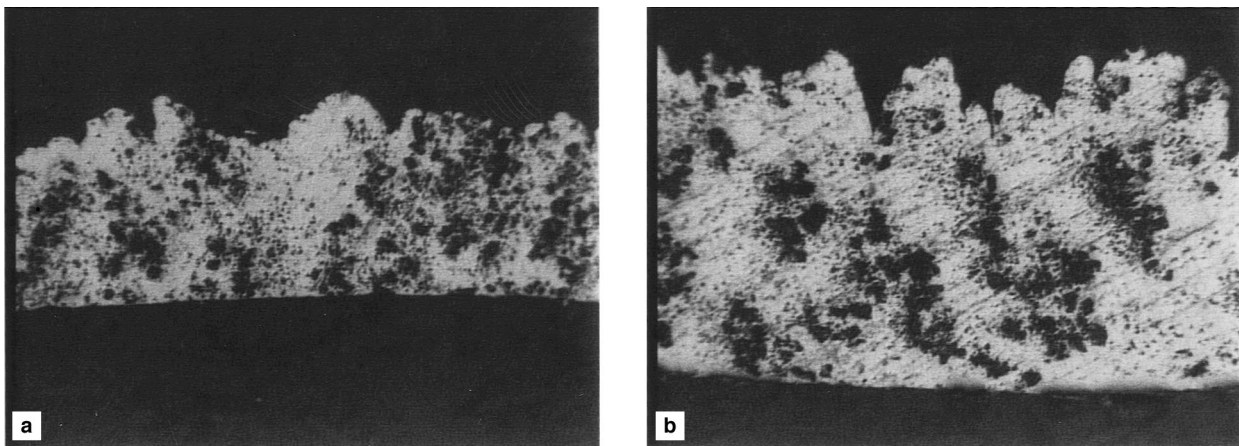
Longitudinal chip sections ($\times 50$) machined with uncoated tools: (a) $V_t = 630$ m/min, $f = 0.03$ mm/rev; (b) $V_t = 1000$ m/min, $f = 0.03$ mm/rev
